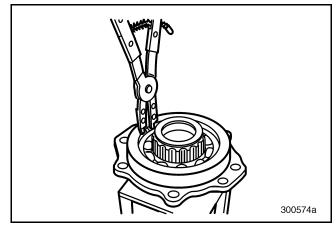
Installing Snap Ring into Main Drive Pinion Bearing Cover
